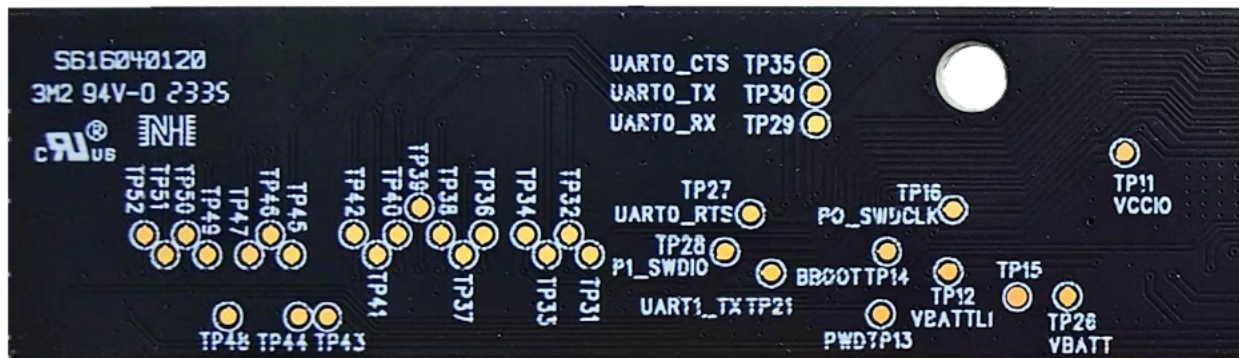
Marked Position on the Bottom Side of Keyboard PCB
